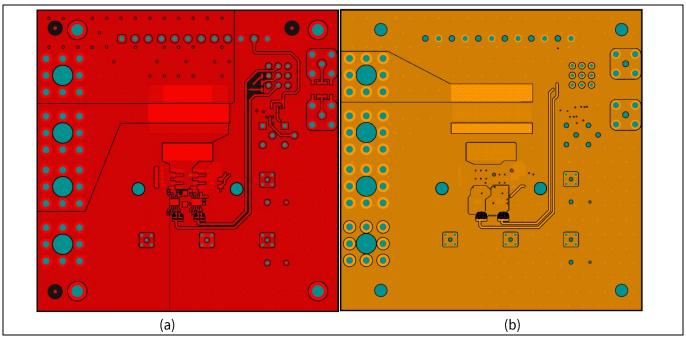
(a) PCB layout top-layer; (b) mid-layer 1
